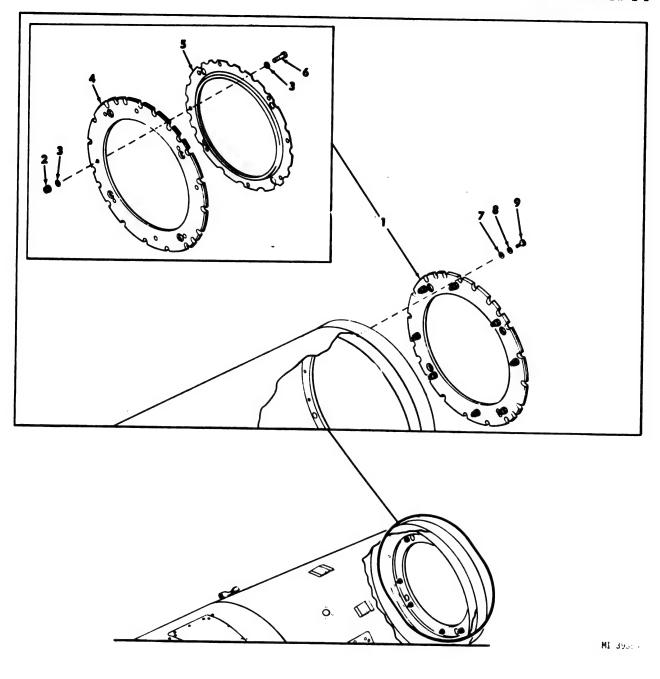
MOTOR SECTION /9028468/ /SEE FIGURE 49 FOR NEXT HIGHER ASSEMBLY/
